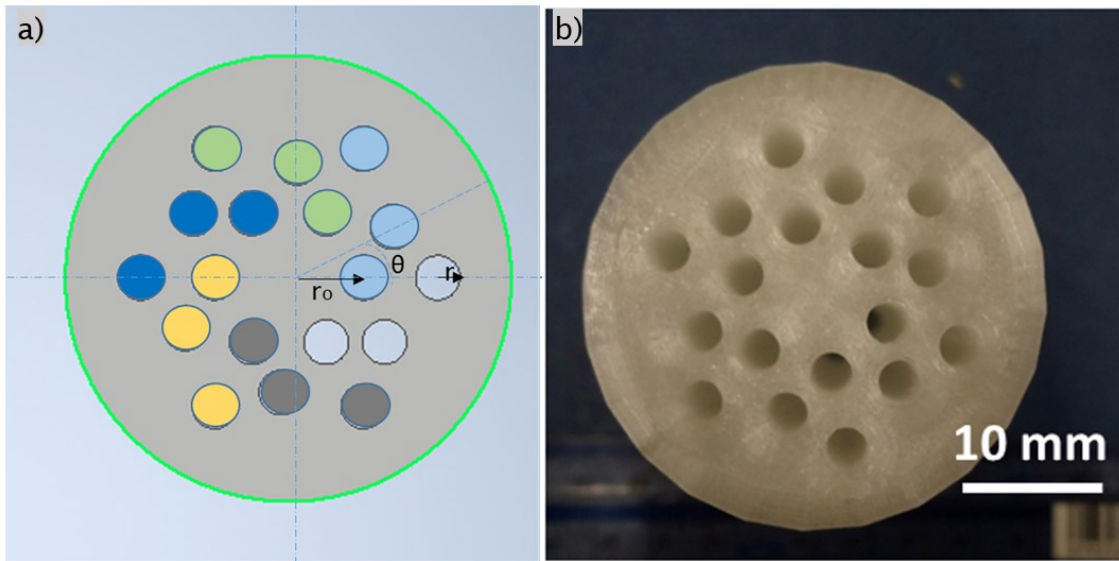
3D printed PMMA preform using spiral PCF design; a) CAD model; b) the printed preform.
